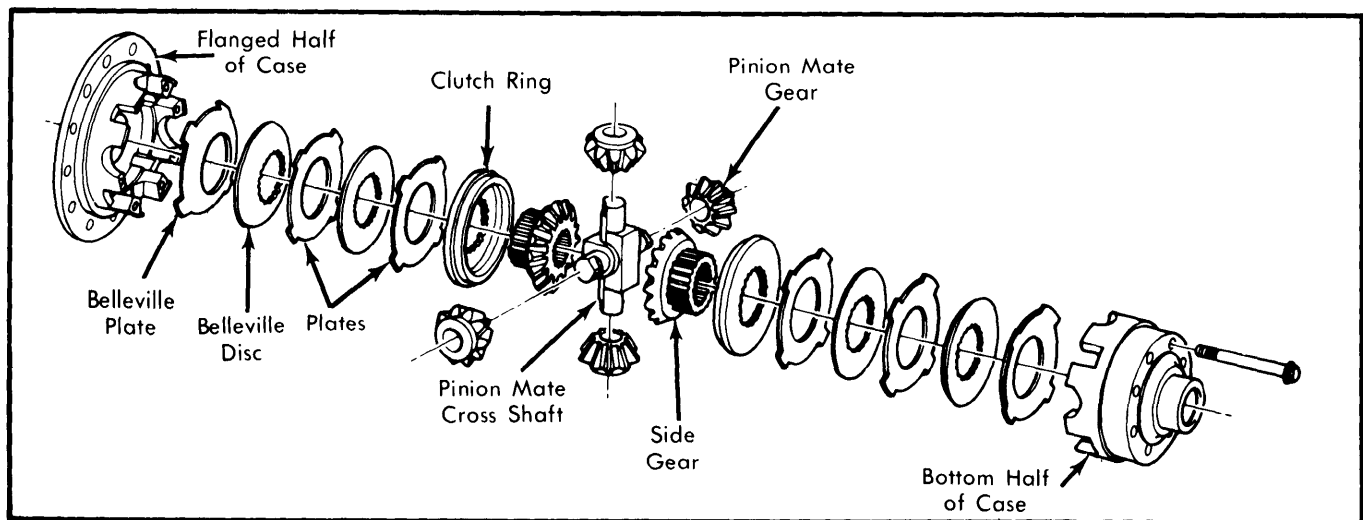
Exploded View of Dana/Spicer Power-Lok Differential Assembly
